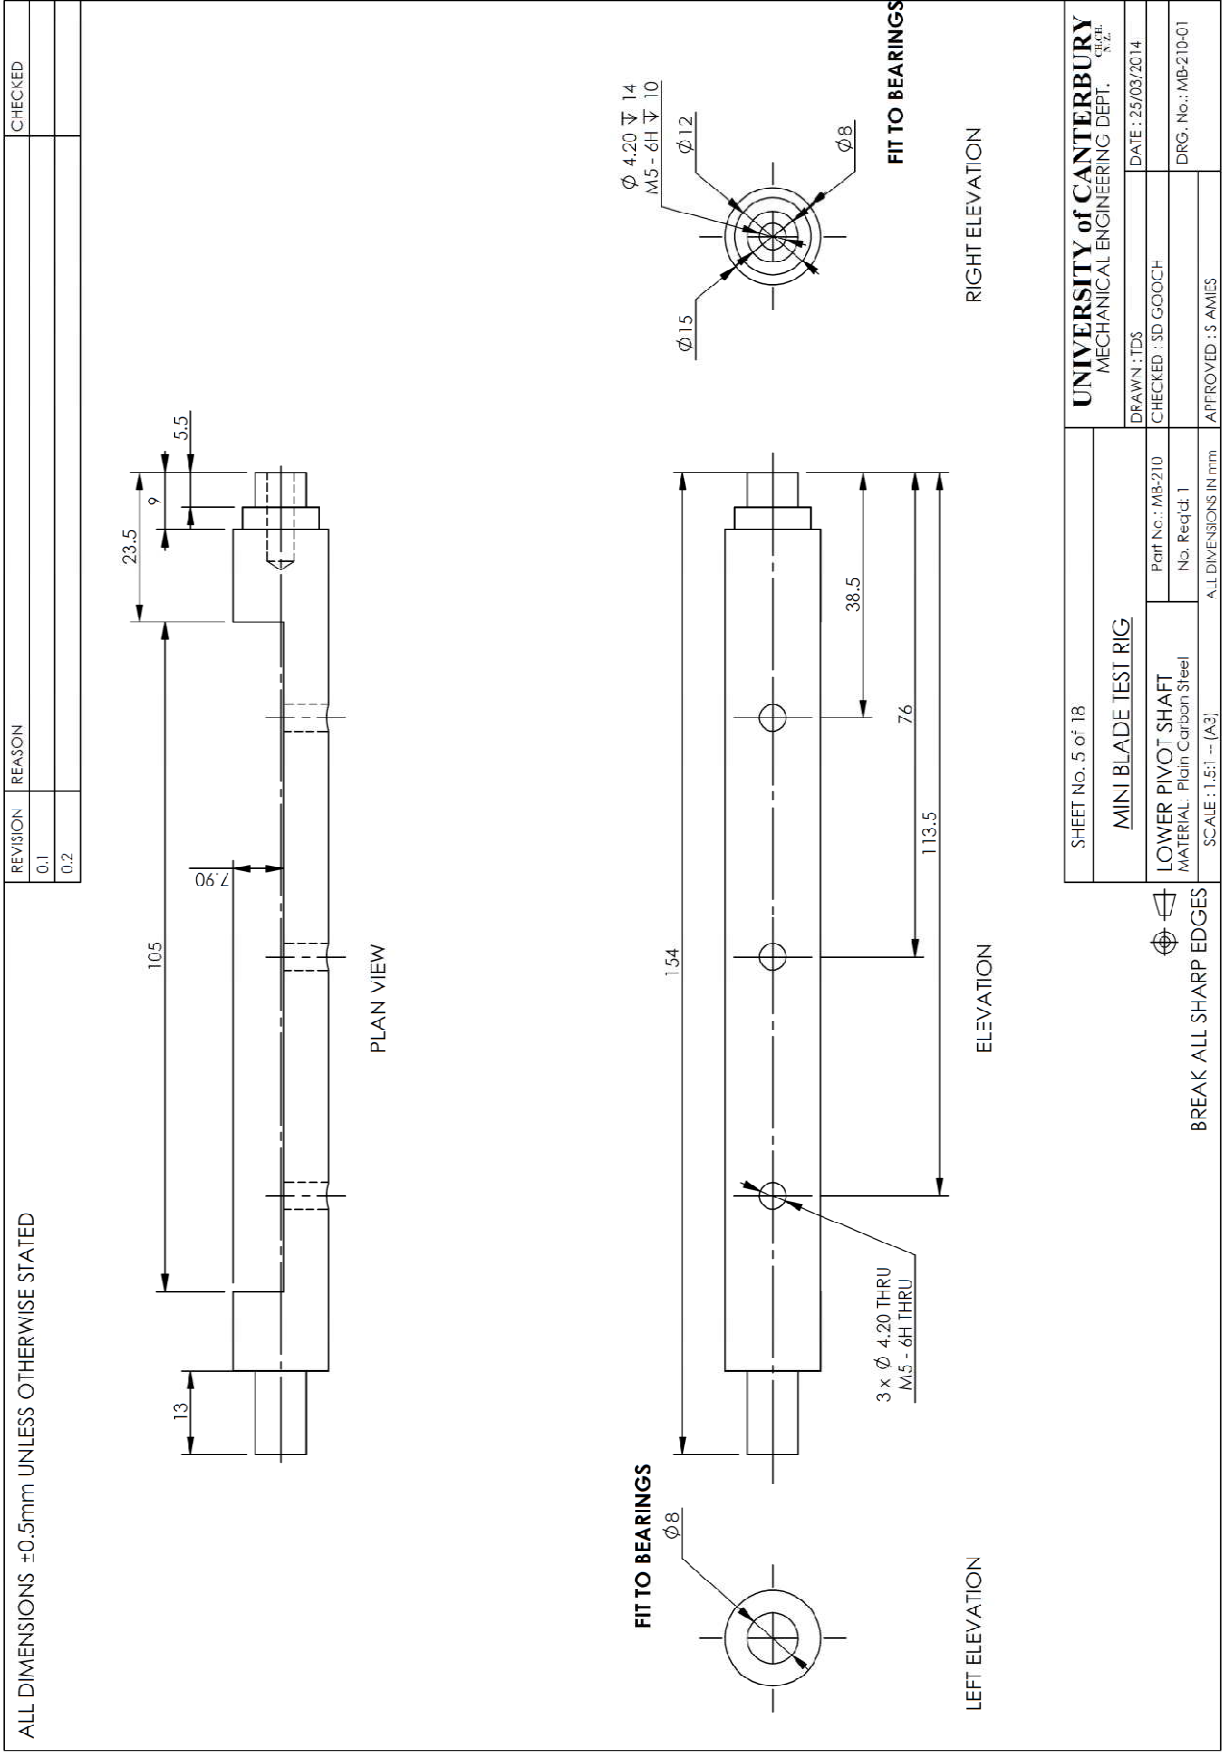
Manufacturing drawing for the lower pivot shaft in variable stroke test rig.
